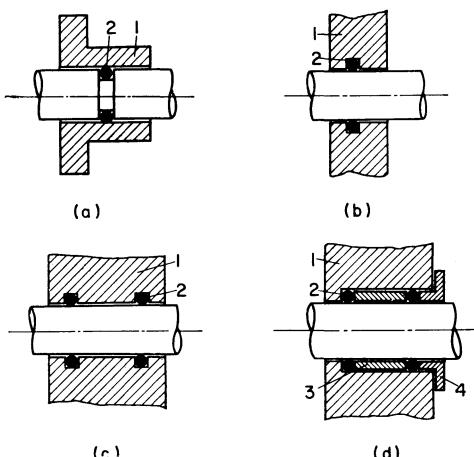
Sliding and rotary O-ring shaft seals: (a) with single O-ring in a groove machined on the shaft; (b) with single O-ring in a groove machined on the chamber; (c) with double O-ring seal; (d) with two O-rings and a spacer; (1) chamber wall; (2) O-rings; (3) spacer; (4) sealing ring
